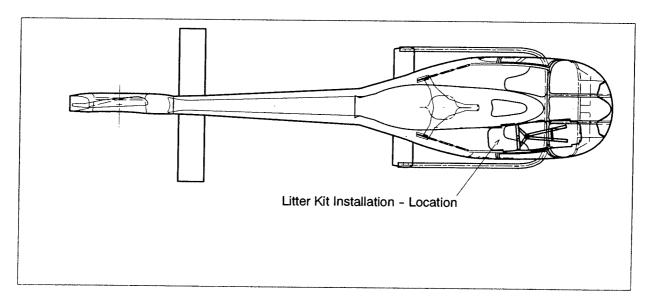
Litter Kit Installation - Location (Top View - 7 place shown)
